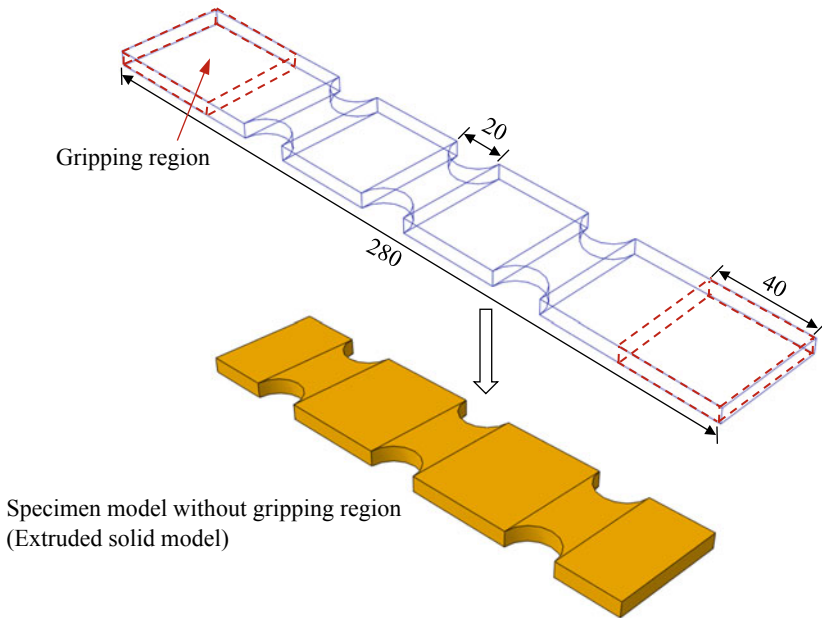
FE model of notched steel specimen (all dimensions are in mm)
